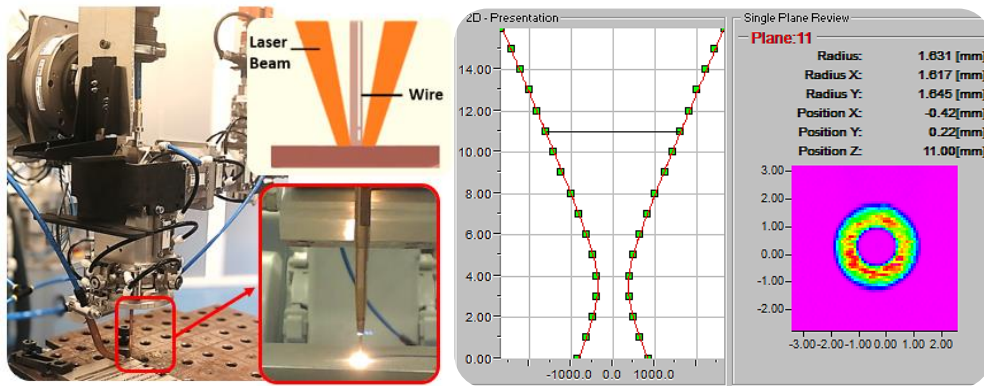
Integration of the coaxial wire processing head and laser beam analysis at the working plane
